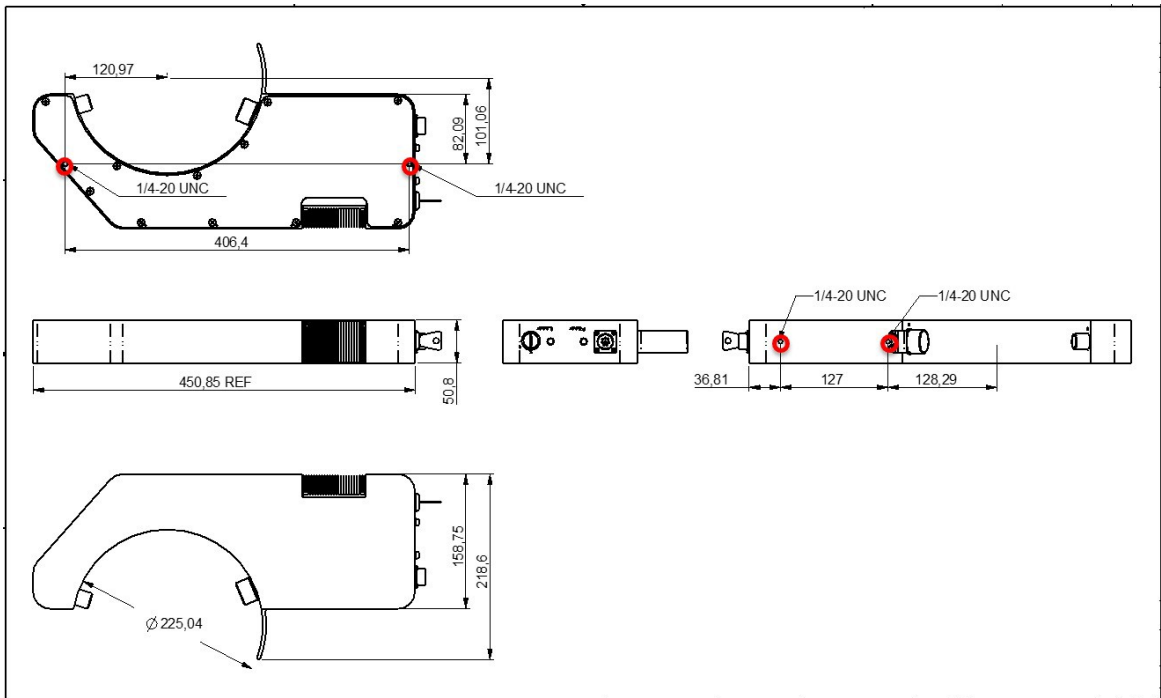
Schematic showing the TK2-PDI enclosure mounting holes.
